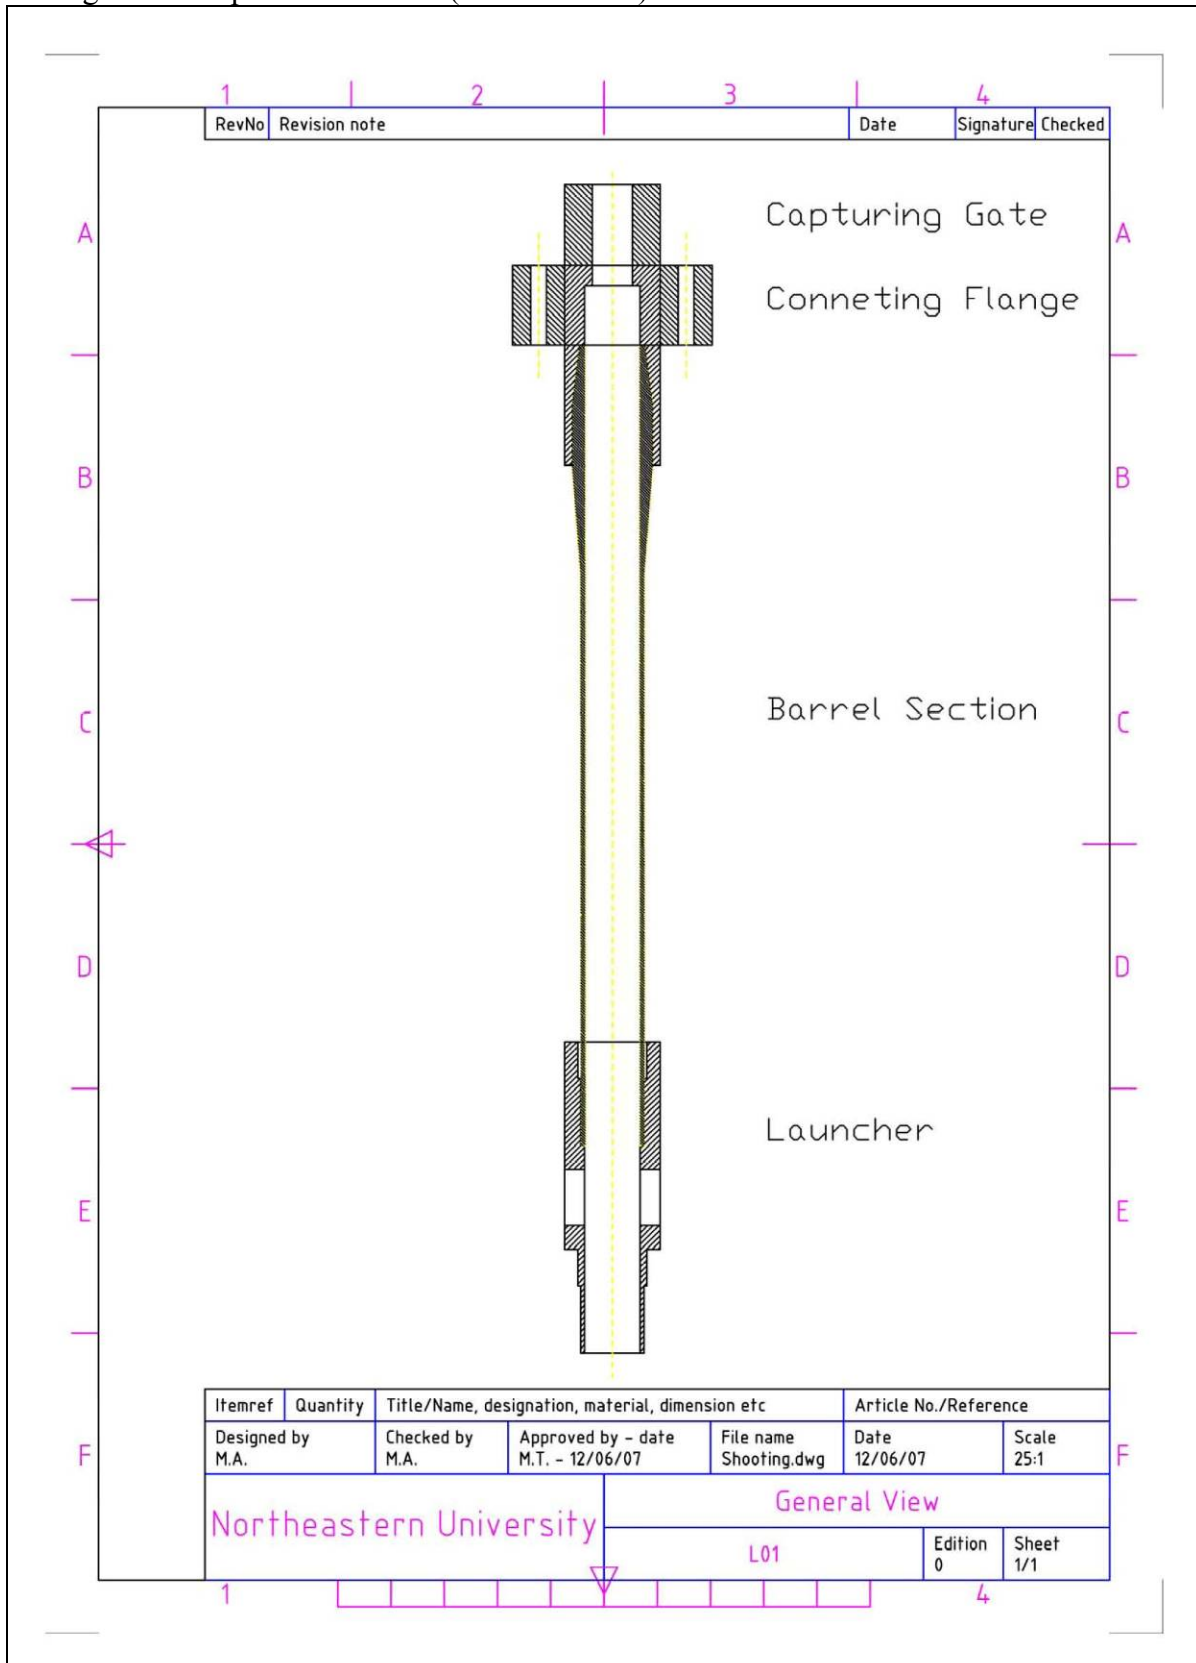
Preliminary Design (Launching Setup-Damping Section)
